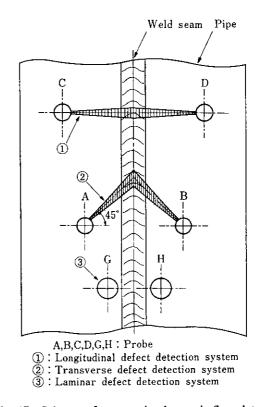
Schema of automatic ultrasonic flaw detector for weld of spiral weld pipe
